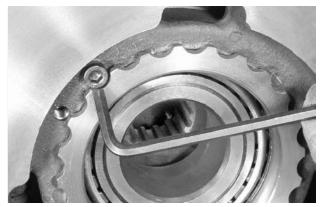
Only if removing or adjusting, remove the screw (27).
